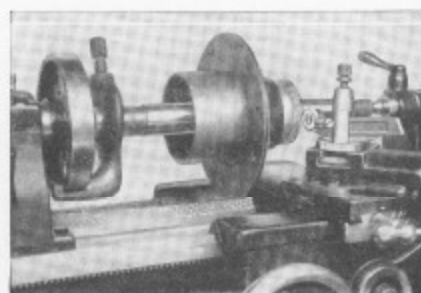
Re-threading a Damaged Front Wheel Hub Mounted on a Mandrel.
